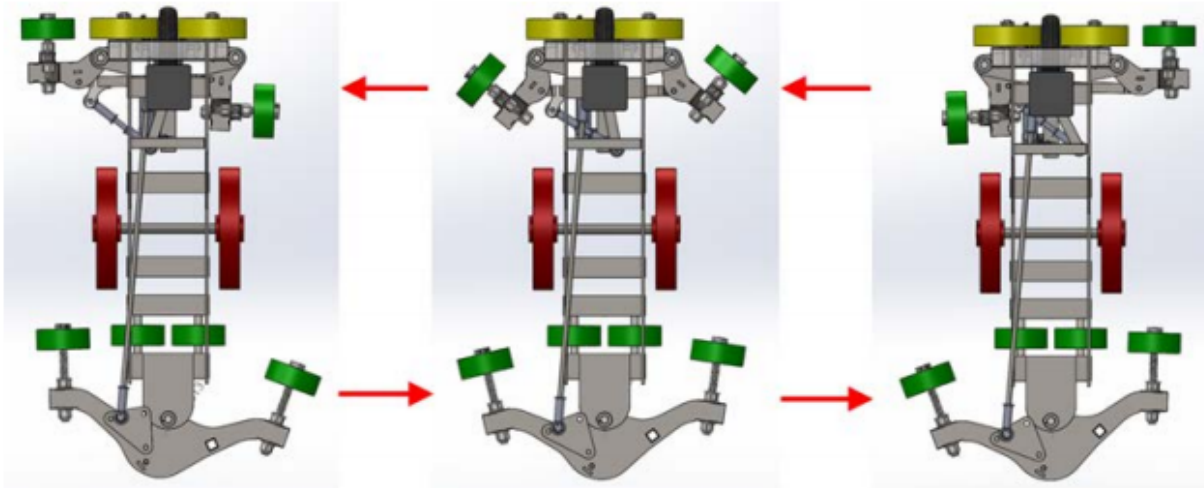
Steering mechanism for bogie using guide rails as support (Acoba et al., 2016). Full assembly along with the guideway is shown in Figure 3.
